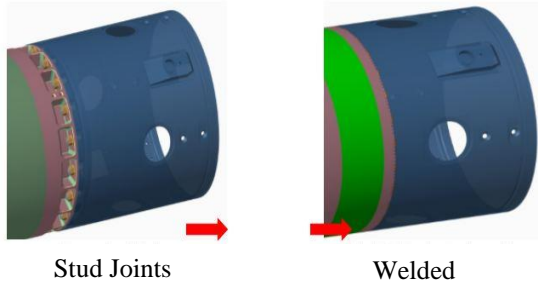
Simplified DFA Welded Actuator Housing
